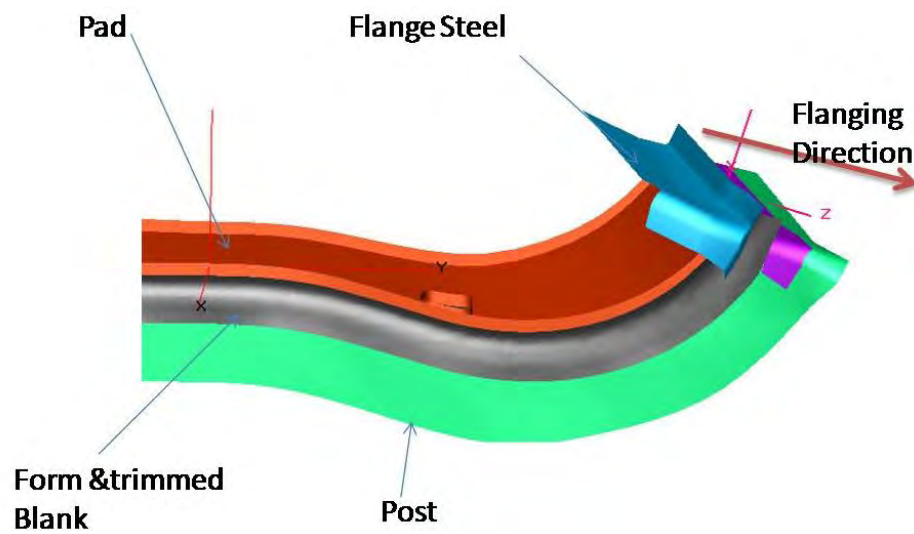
Rear Rail Outer Tool Layout for End Flanging
